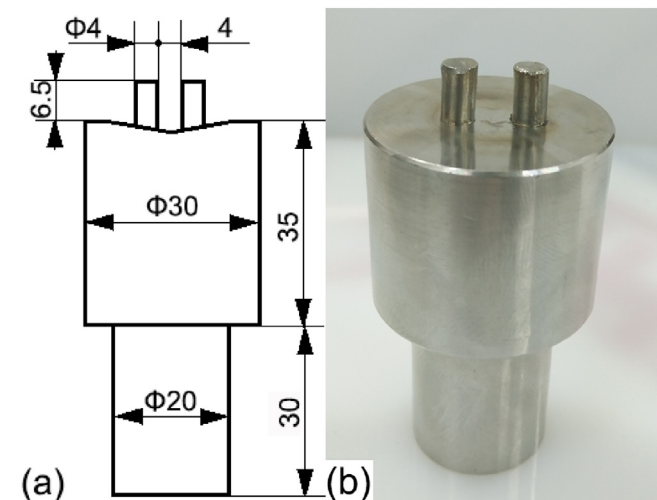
(a) The size and (b) the photograph of double-pin tool.
